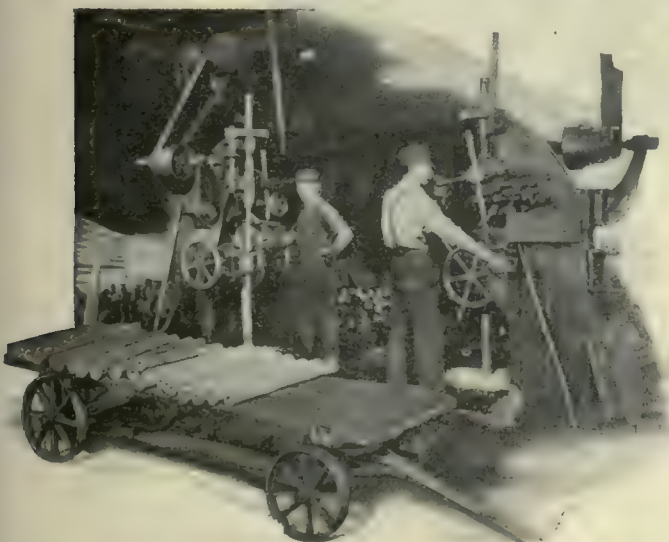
Centering Billets before Heating for Piercing Mill.
